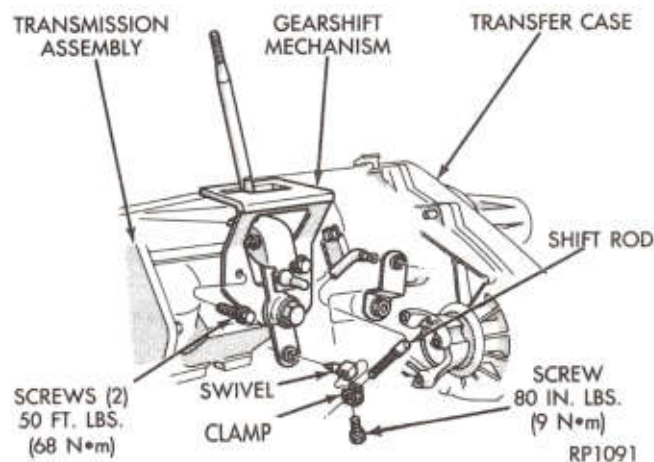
Gearshift Mechanism Lubrication (NP241 Transfer Case)
